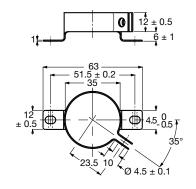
Dimensional outline of clamp for case  $\emptyset$  D = 35 mm
